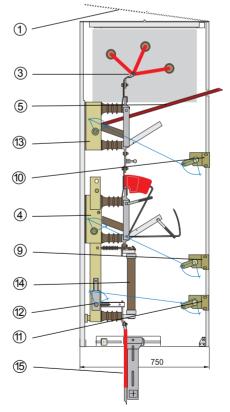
12 kV Transformer feeder panel with switch-disconnector H22 SEA and disconnecting switch
